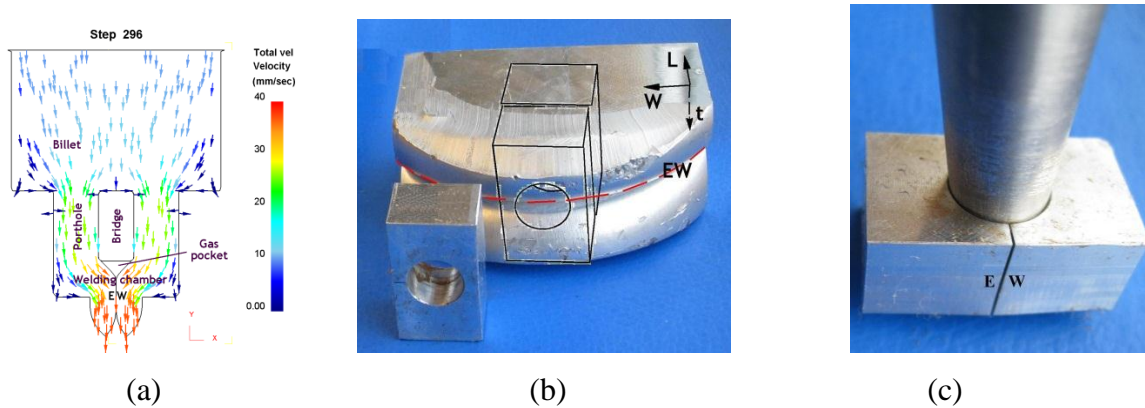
(a) Idealized 2D-extrusion with stable gas pocket behind bridge. Test technique; (b) Location of sample in profile with extrusion weld. (c) Mandrel expansion to specimen fractures.
